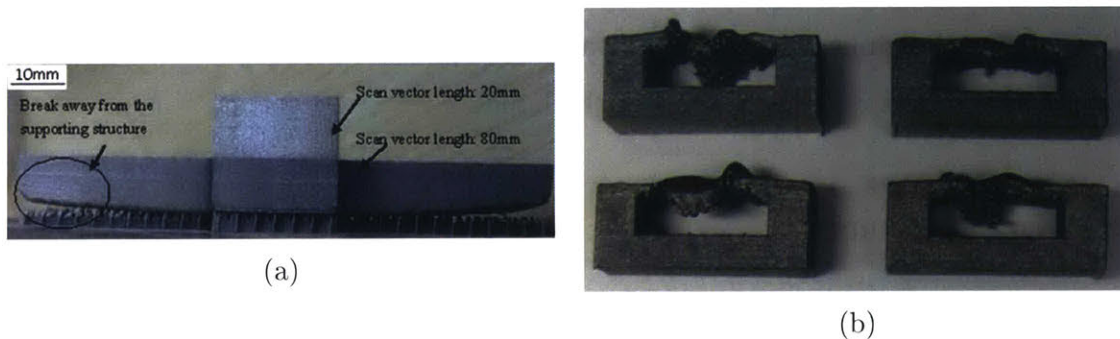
Examples of part failure due to insufficient support including (a) part warping and lifting of off the build plate and (b) build failure on an overhang [93][94].
